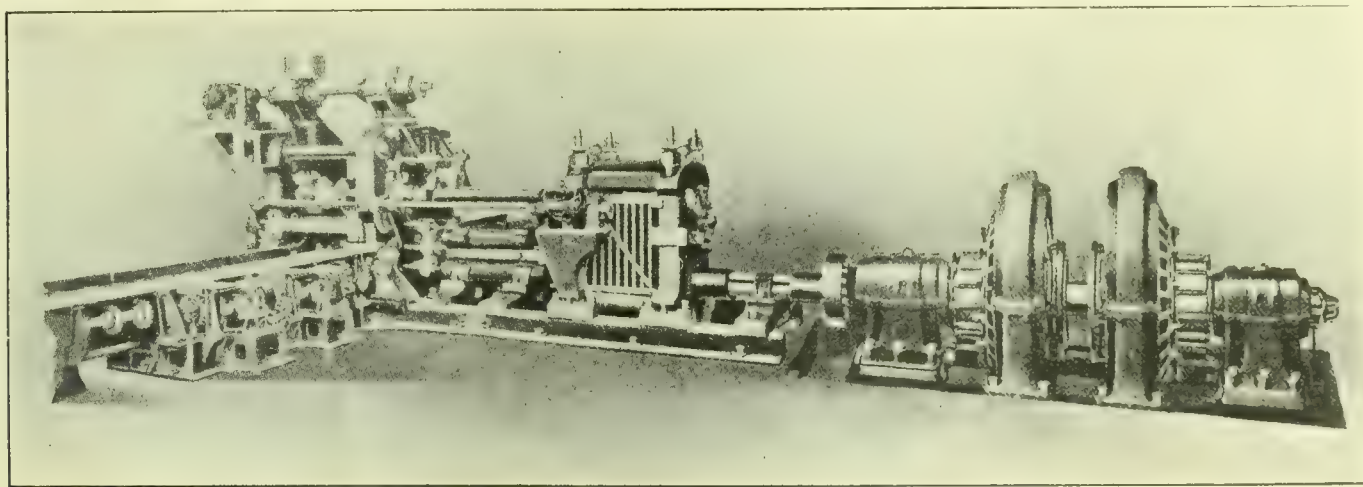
UNIVERSAL PLATE MILL SHOWING THE MOTOR DRIVE. ILLINOIS STEEL COMPANY.
